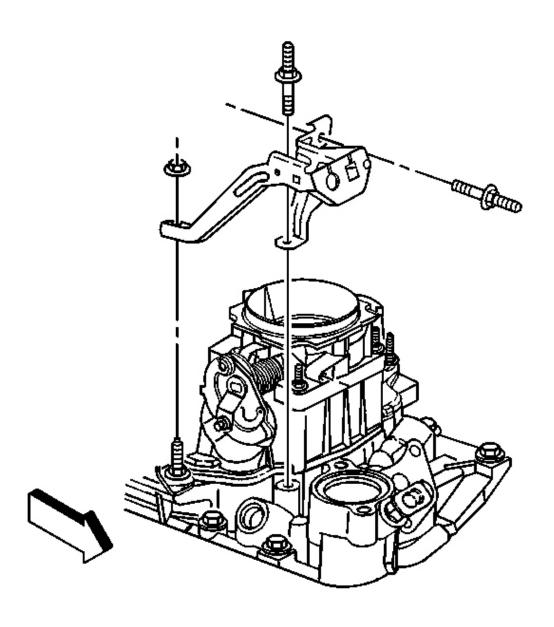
View Of Accelerator Control Cable Bracket Courtesy of GENERAL MOTORS CORP.
